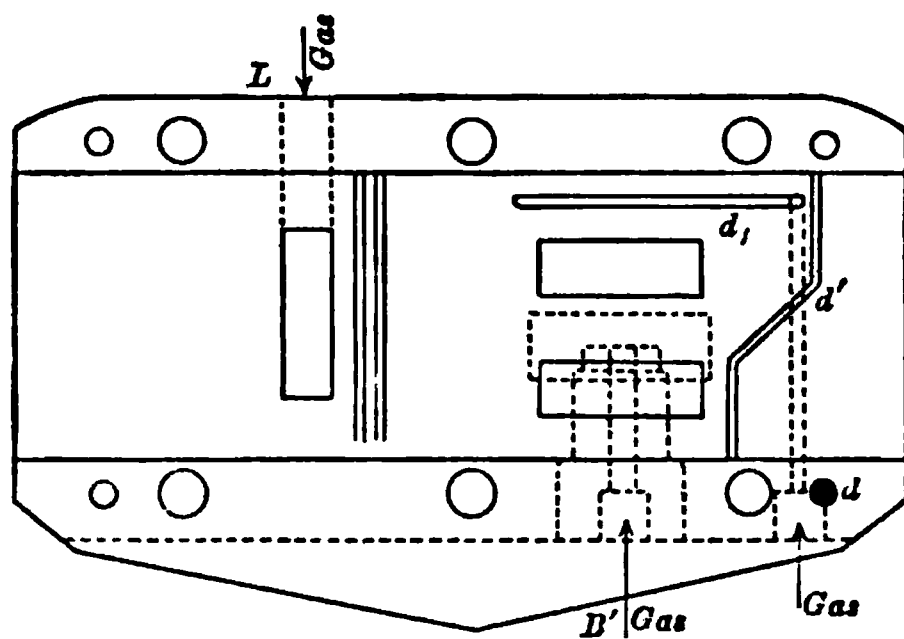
Otto Engine—Vertical View of Slide Cover. 1876.
